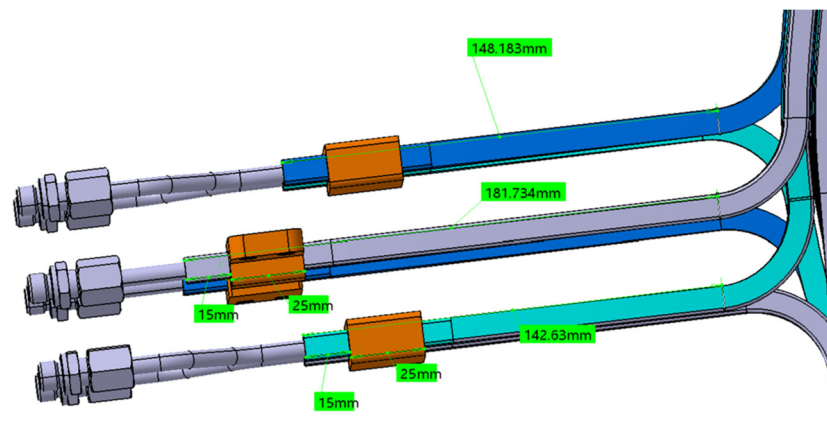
M4 mock up coil joint dimension
